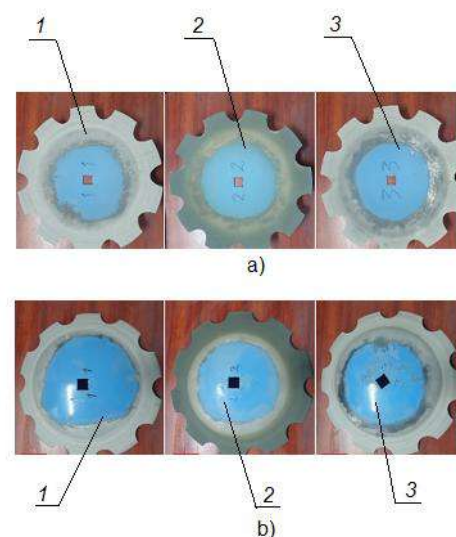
Experimental harrow discs with coatings: a) concave part; b) convex part; 1 - Sample 1; 2 - Sample 2; 3 - Sample 3.
